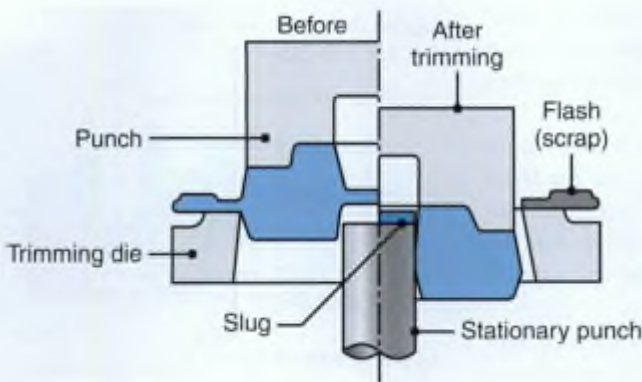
Trimming flash from a forged part; note that the thin material at the center (slug) is removed by punching.
